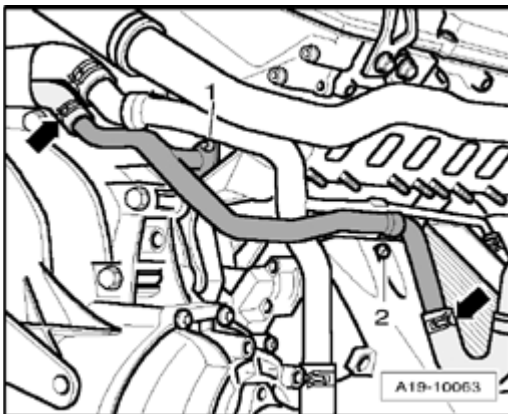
Coolant Hoses At Lower Right Coolant Pipe & Bolts
